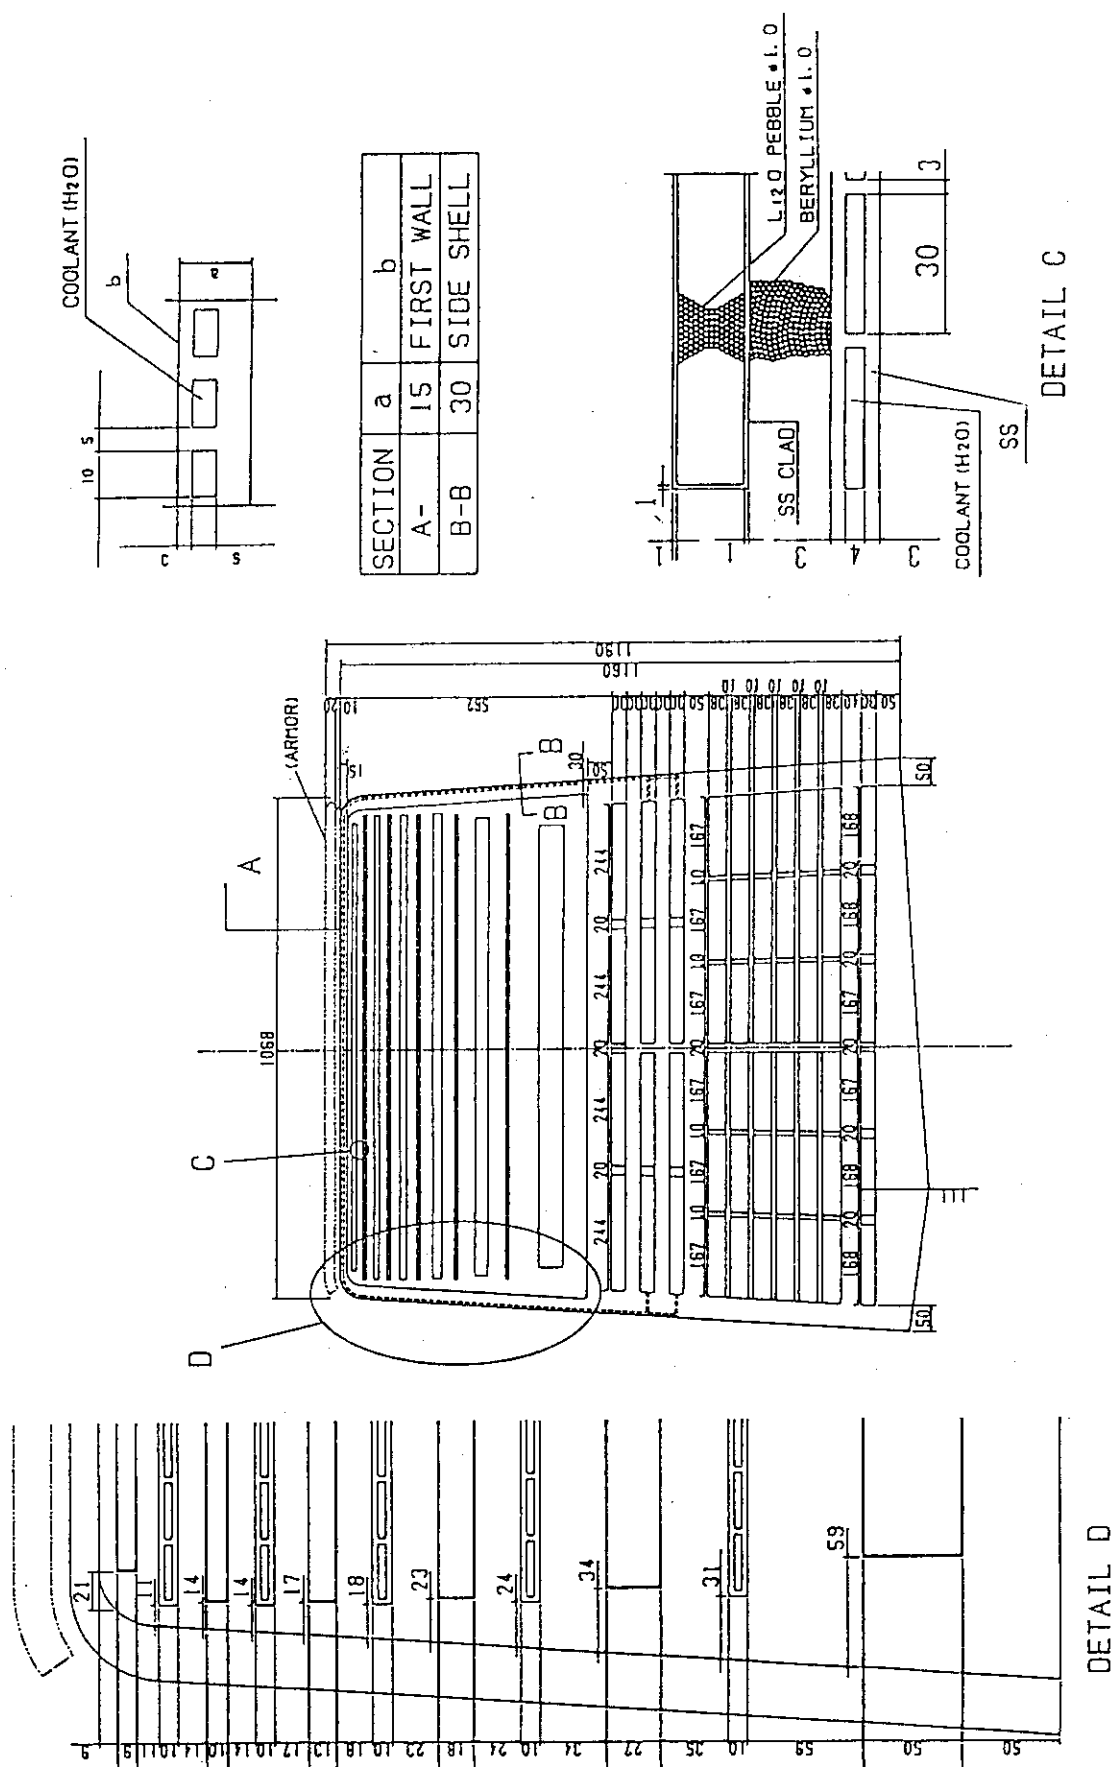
Concept of the layered pebble bed blanket (cross-sectional view of outboard side module at midplane)
